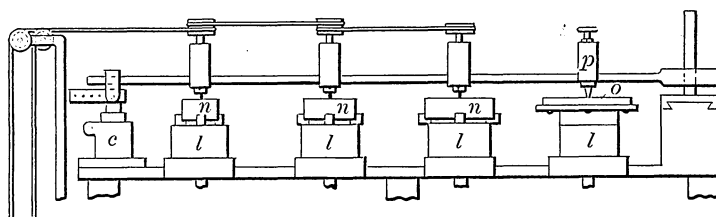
Part Side View, Showing three Milling Tools and a Tracer.
